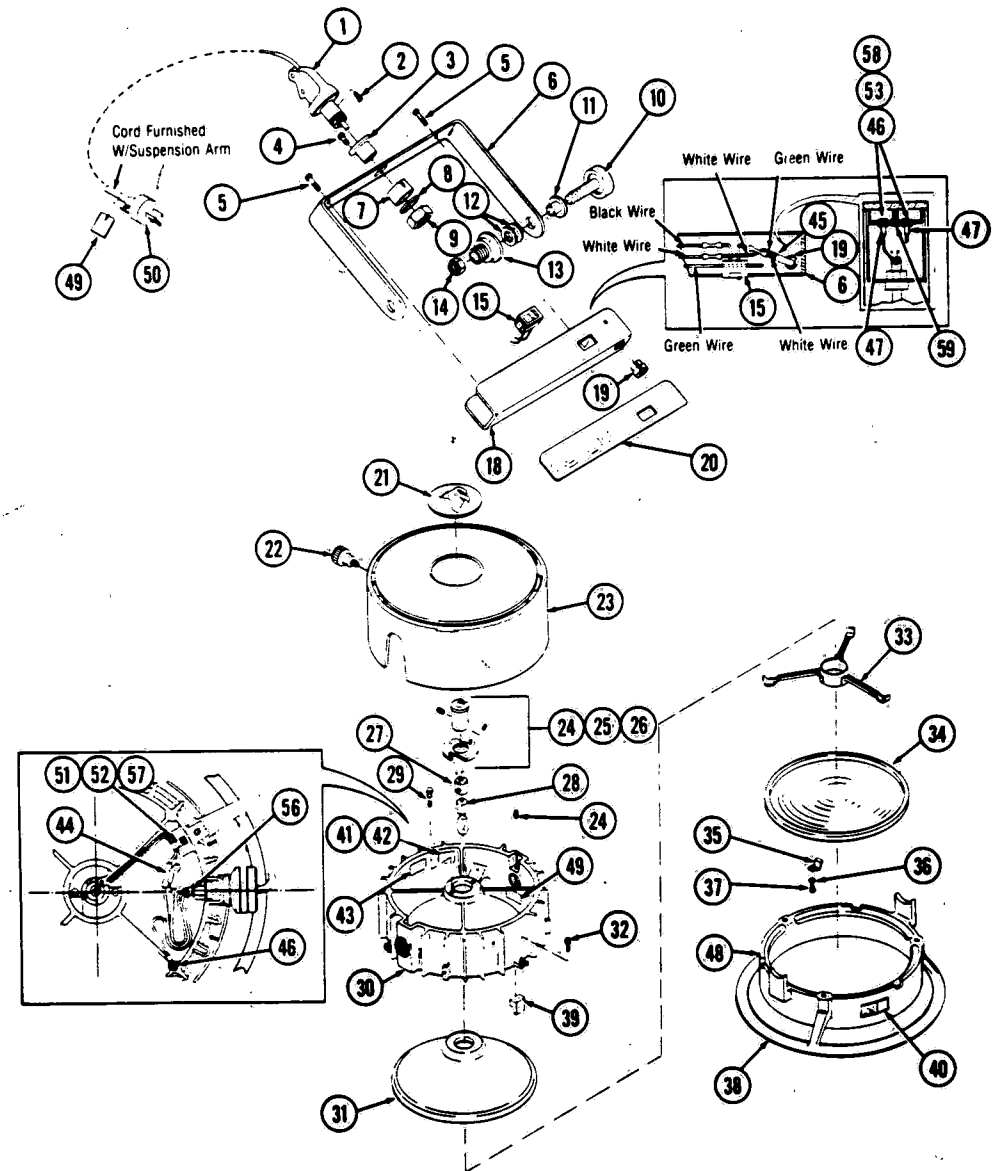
LIGHTHEAD AND SUSPENSION ARM ASSEMBLY.
